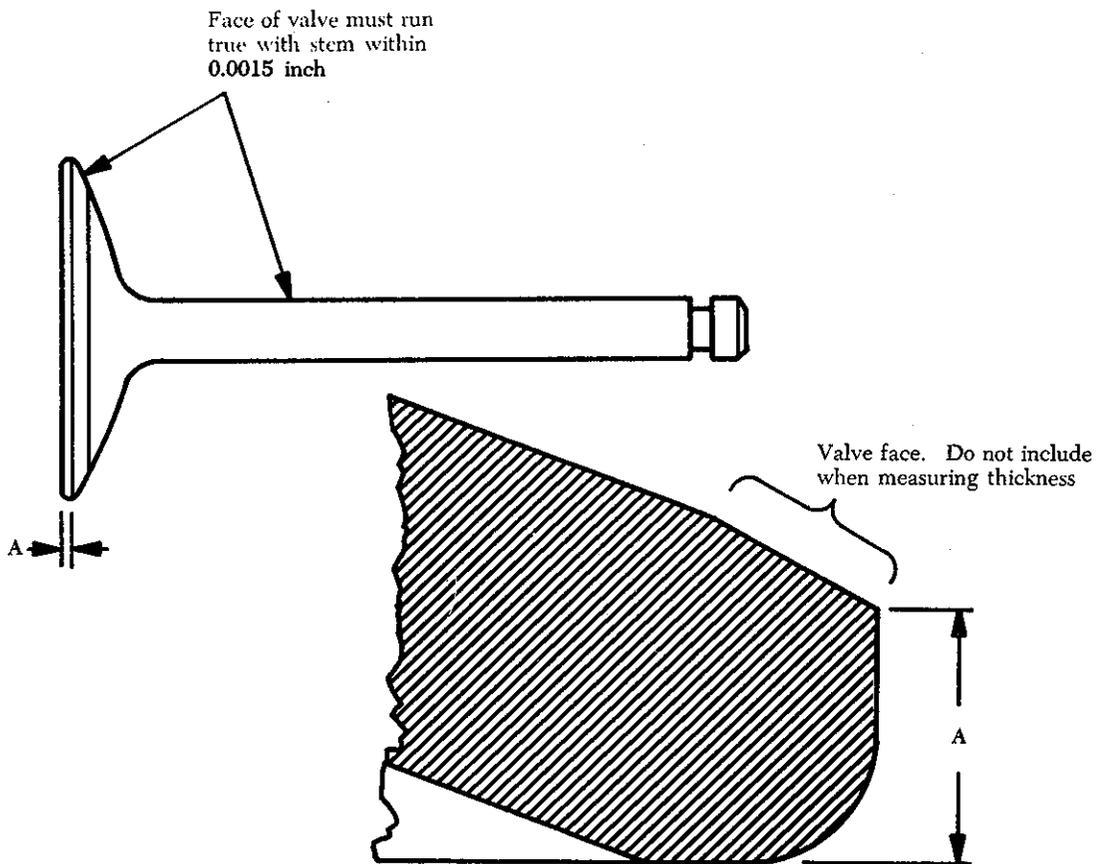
Valve, showing locations for checking runout and section for measuring edge thickness.
